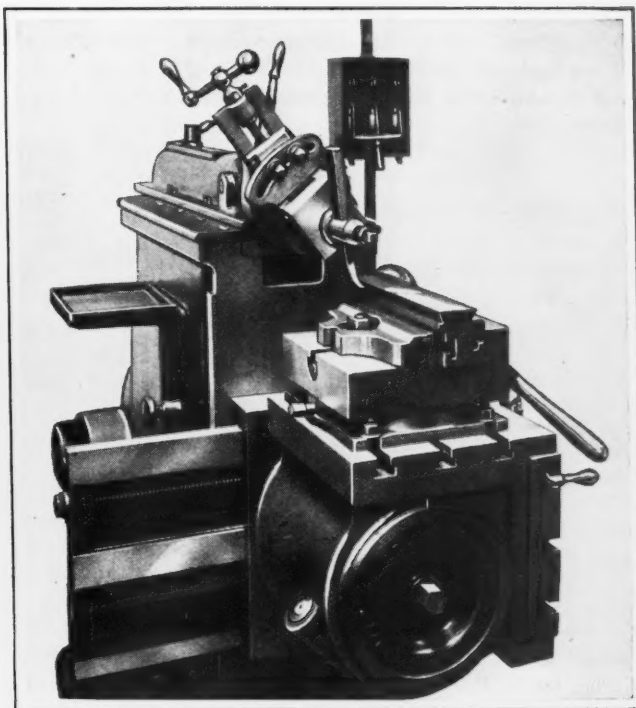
Planing Inclined Side Faces of Dovetailed Slide Bearing
